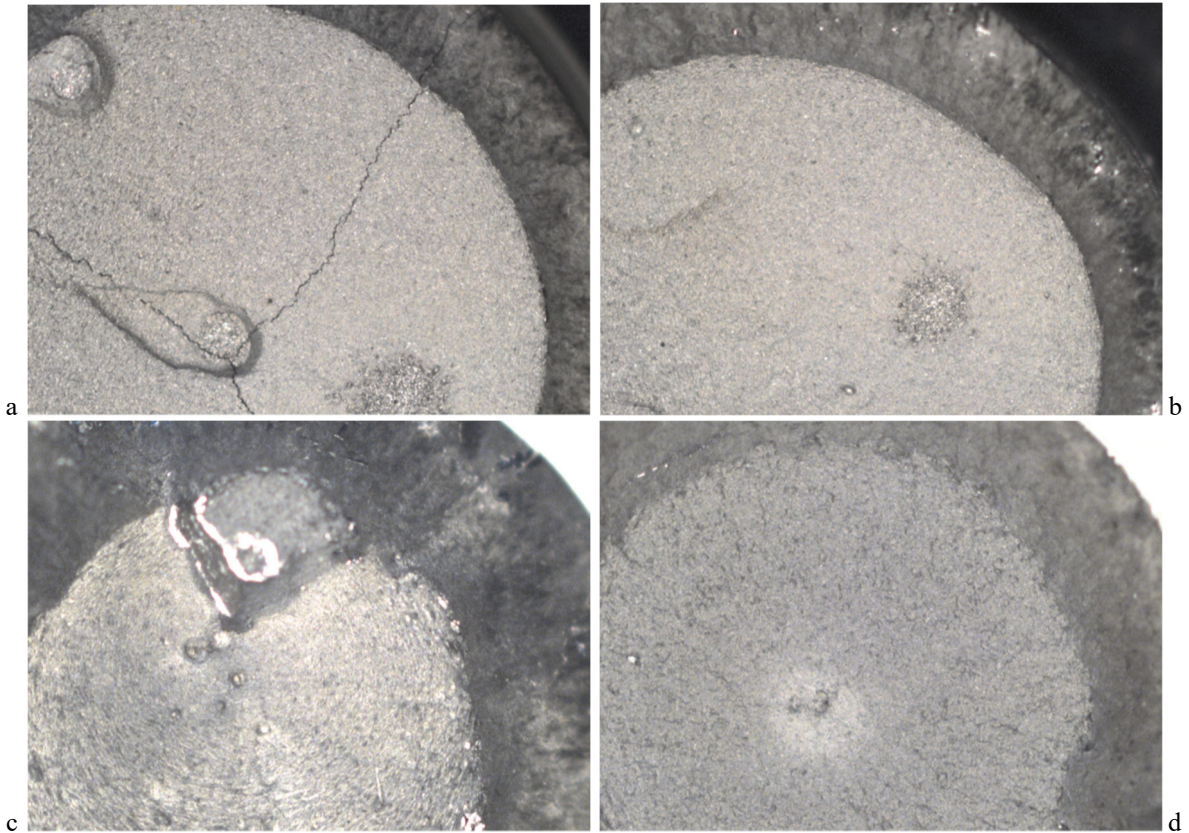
Fracture surfaces of tensile specimens tempered at 160 °C (a), 180 °C (b), 200 °C (c) and 440 °C (d). Low magnification optical microscopy.
